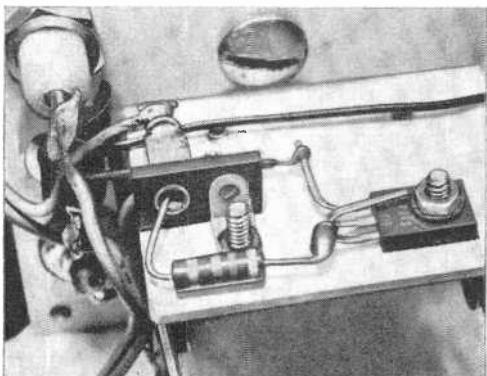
Electronic components are wired together on L bracket secured to front plate of the box.
